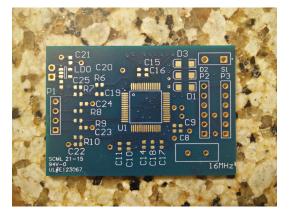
The image shows a close up of the top of the printed circuit board after assembly.
